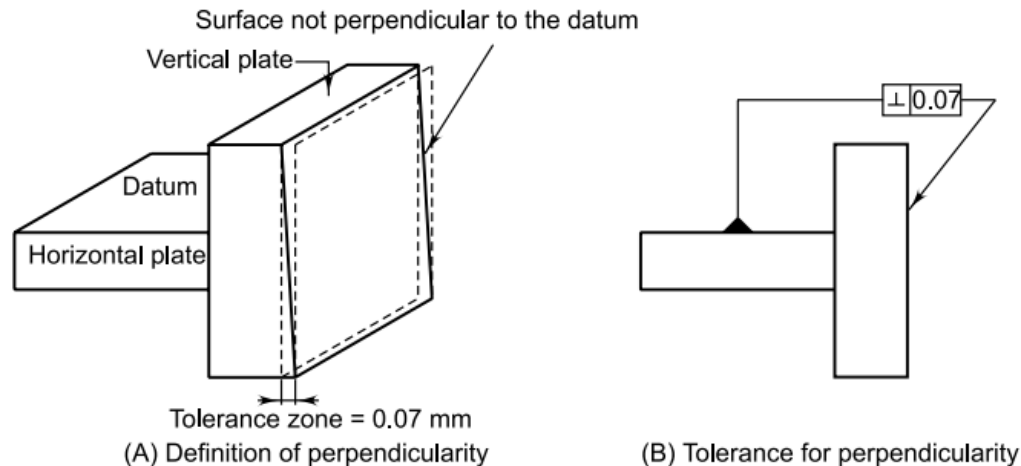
Indicating Perpendicularity of a Surface on Drawing
